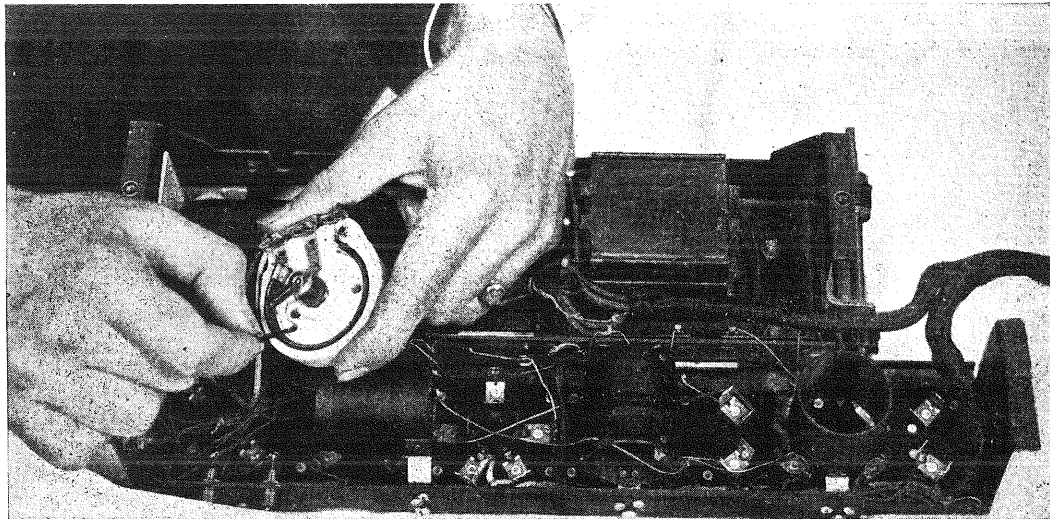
Adjusting the contact arm to secure improved contact with resistor strip.
